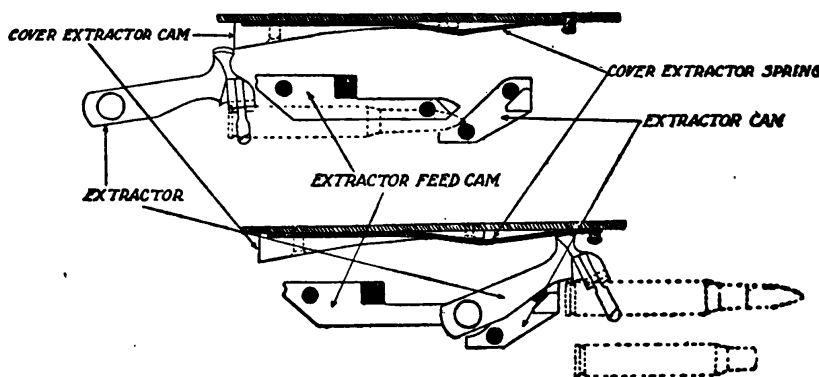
Extracting and loading mechanism, Browning caliber .30 machine gun.
